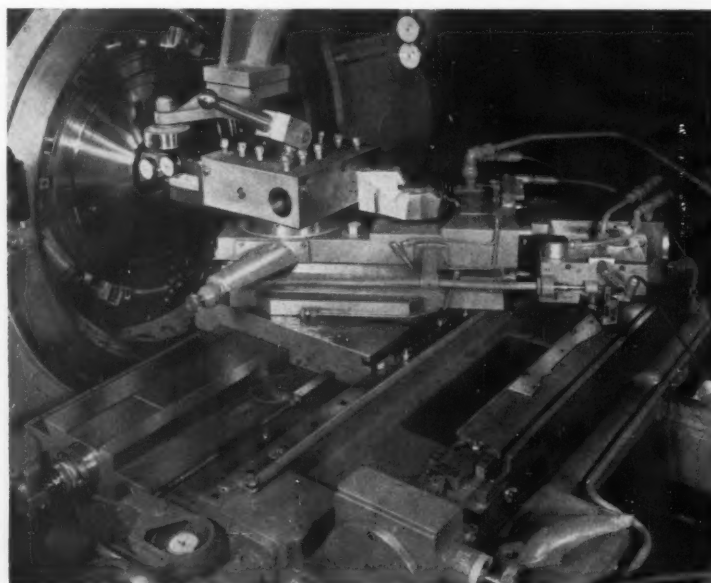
Close-up view showing how the cutting tool of machine shown in Fig. 1 is accurately positioned for the boring cut. Note roller support to the disc, JETracer slide, and four-position tracing template carrier with template.
